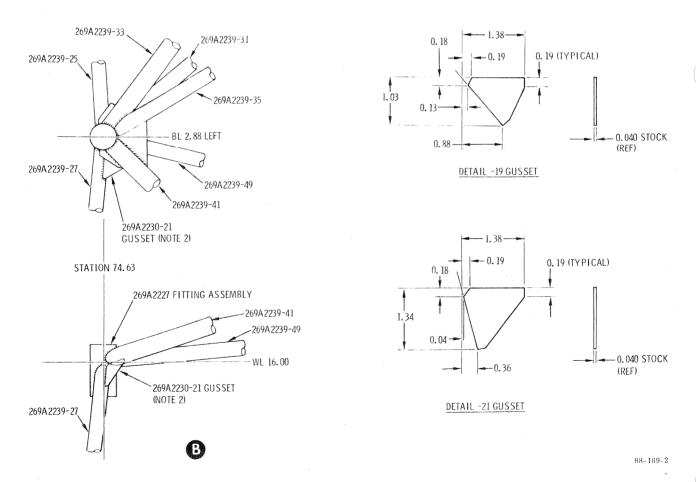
Modification - Fuselage Frame Assembly (Sheet 2 of 2)
